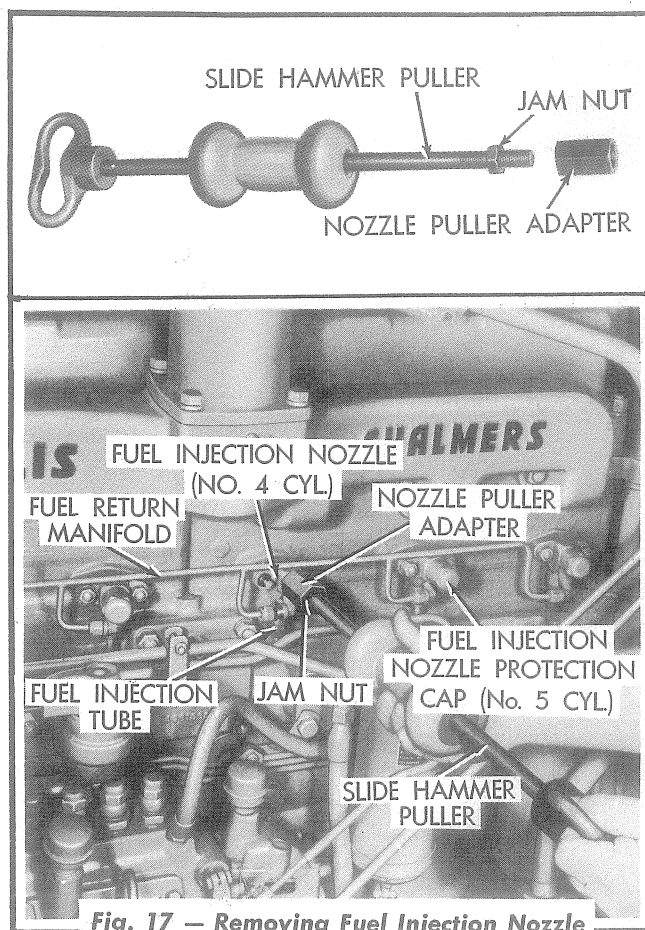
Removing Fuel Injection Nozzle (Tractors Prior to Serial No. 4001)
